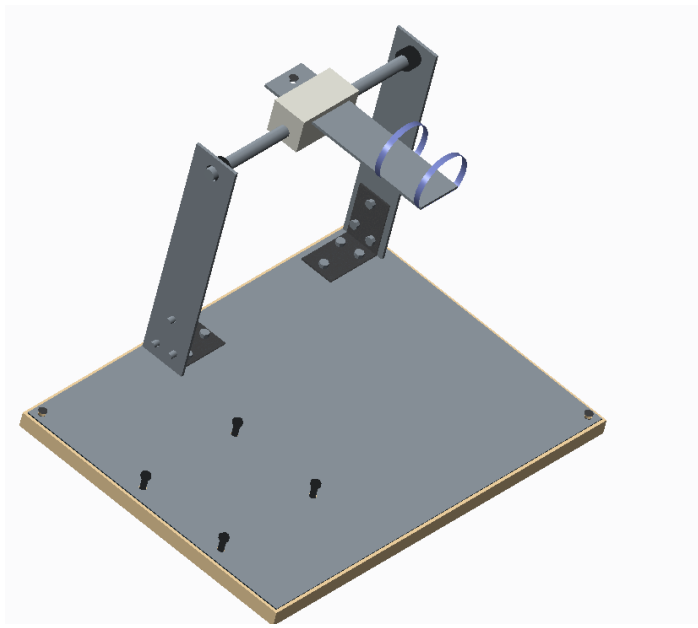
Final Blade Bandit Design as a CAD Drawing.
